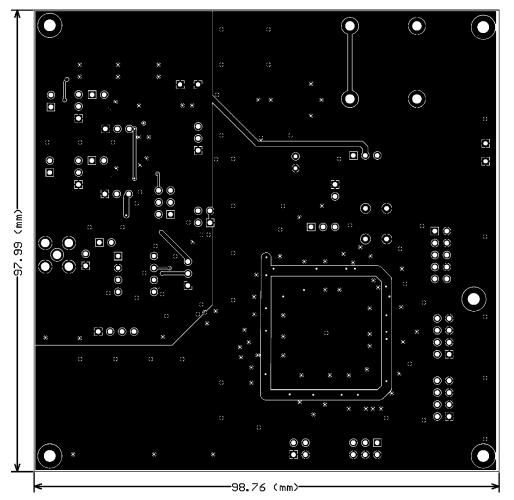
Bottom Layer LMV1022 / LMV1023 Demo Board
